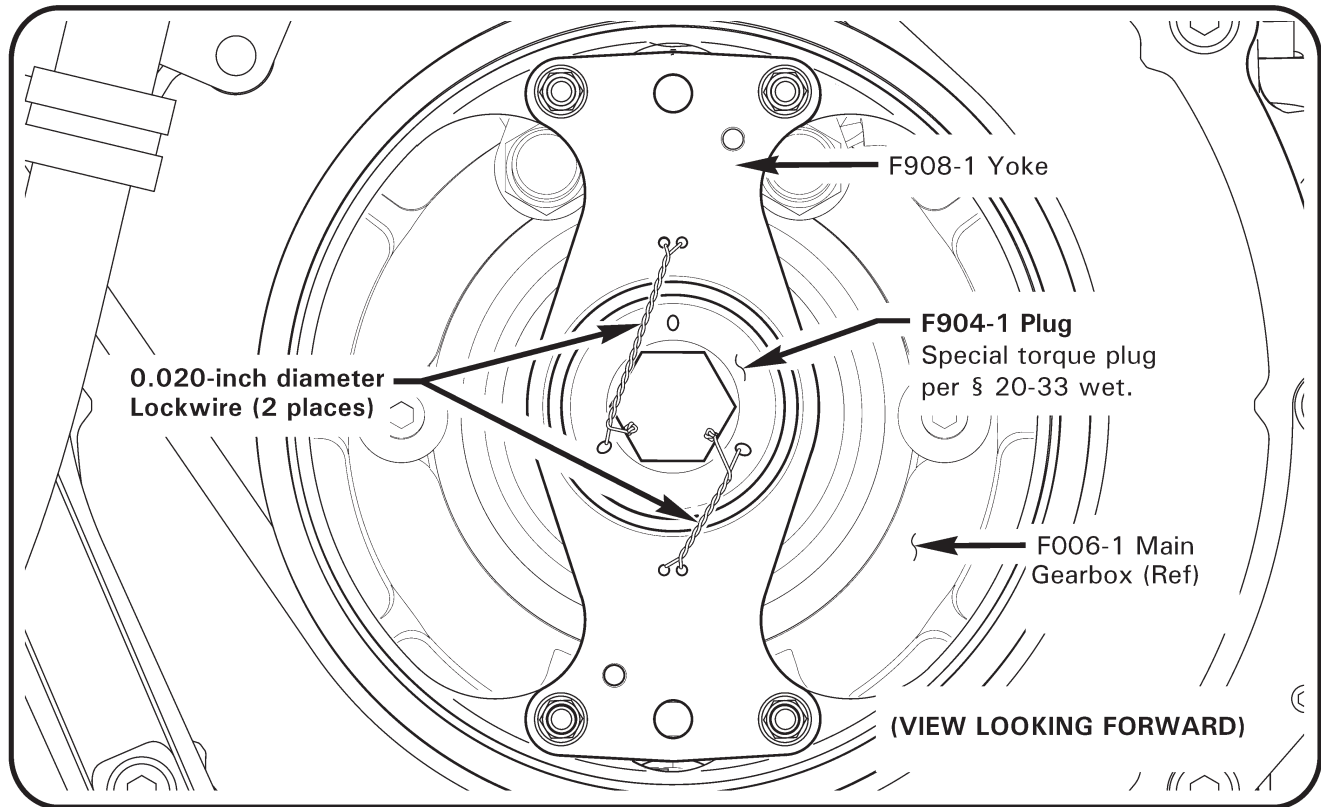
F908-1 YOKE ASSEMBLY INSTALLATION
